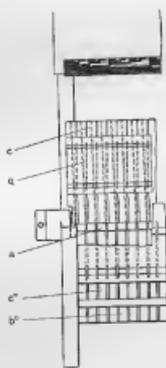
Stringertype: gear for distributing matrices. Front view.
